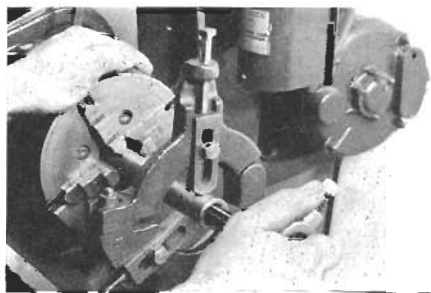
Finishing a Tapered Hole with a Hand Reamer
